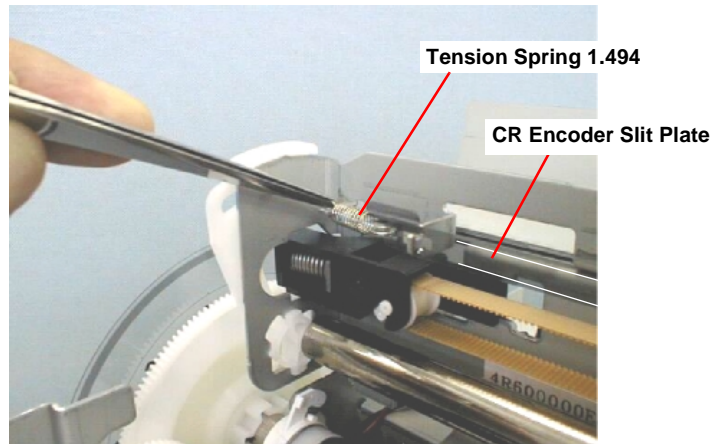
Remove the Tension Spring 1.491& CR Encoder Slit
